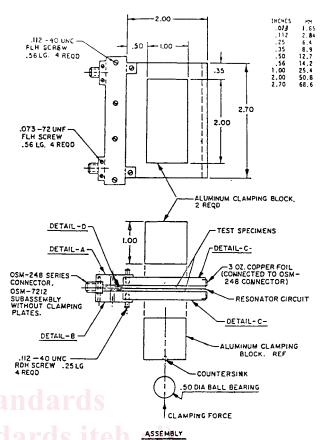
Test Fixture Construction, Older Design (Fixture B)
